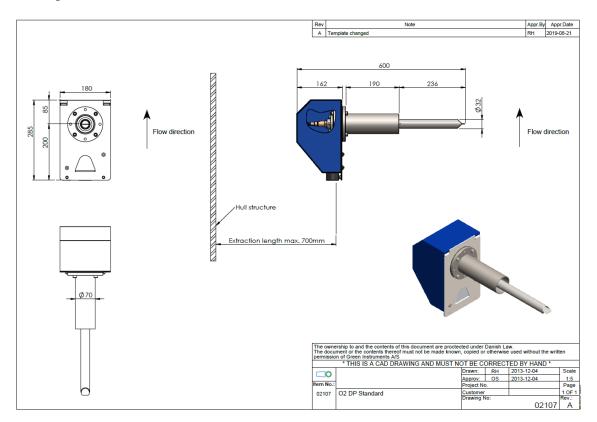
Diffusion Probe Standard – Welding Type
